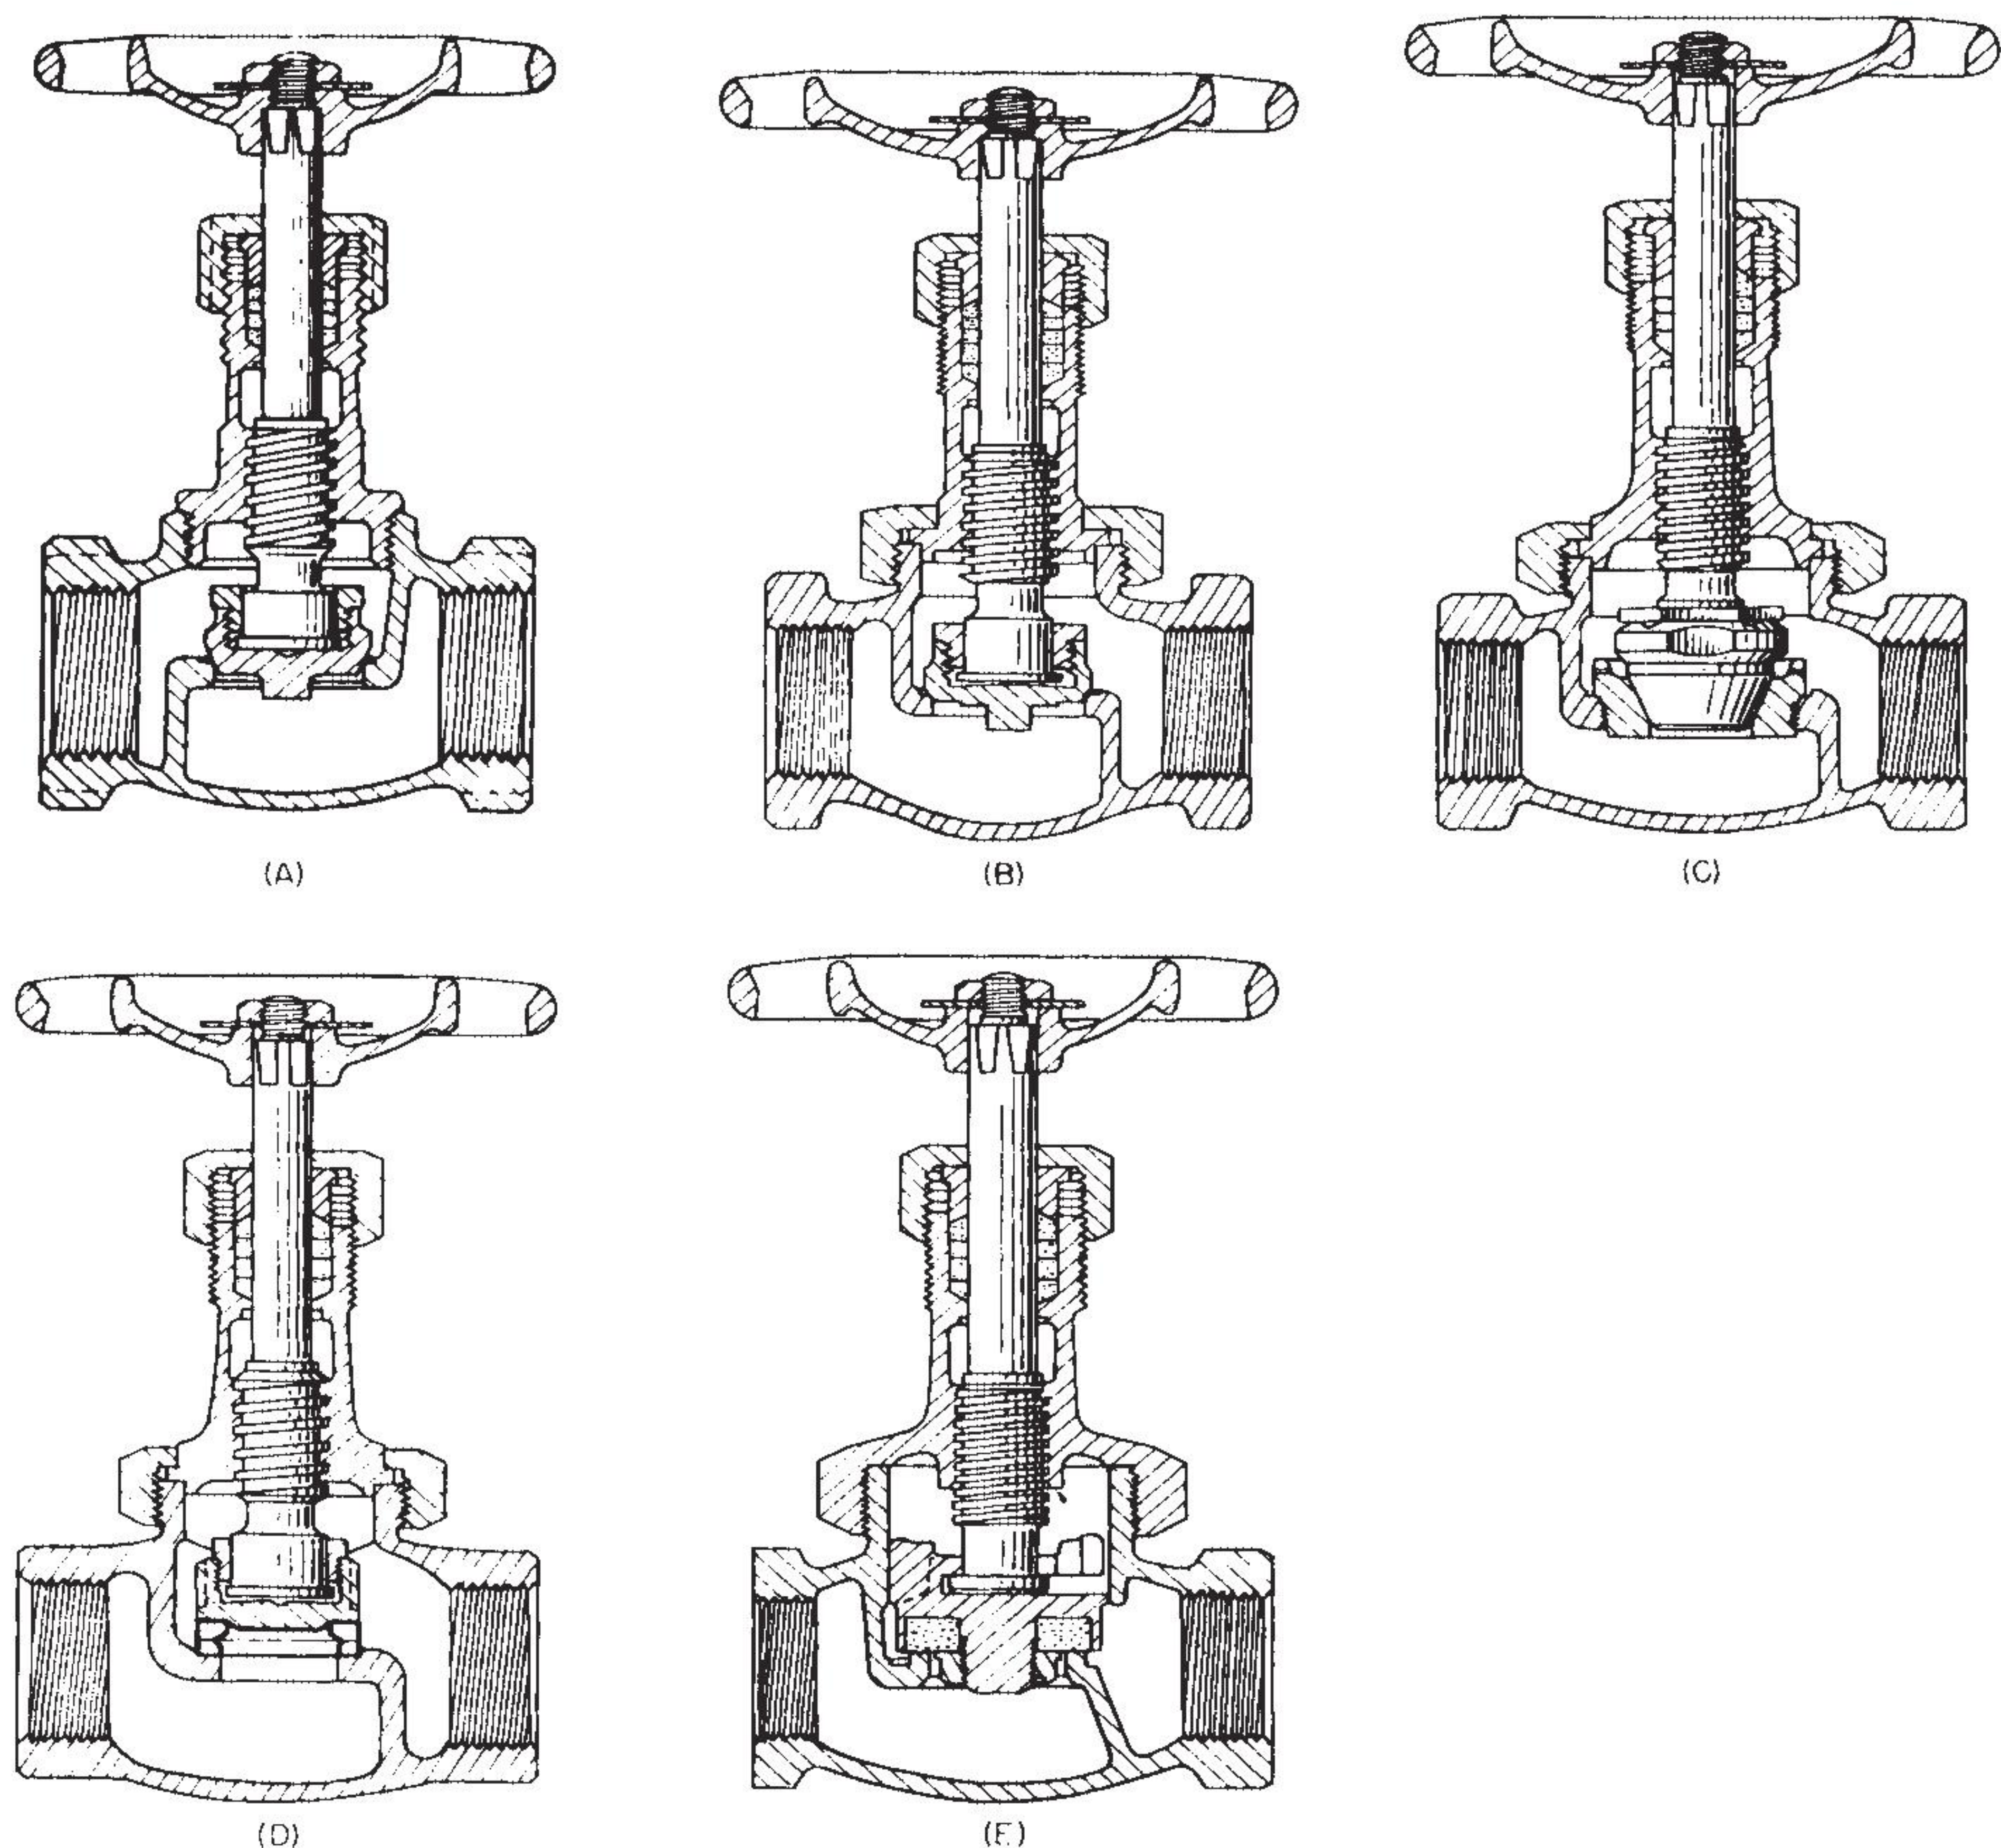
Bronze globe valves. A. Threaded-bonnet globe. B. Union-bonnet regrinding globe. C. Renewo globe, plug type. D. Flat-seat globe, 600 Brinell. E. Nonmetallic-disk globe.
